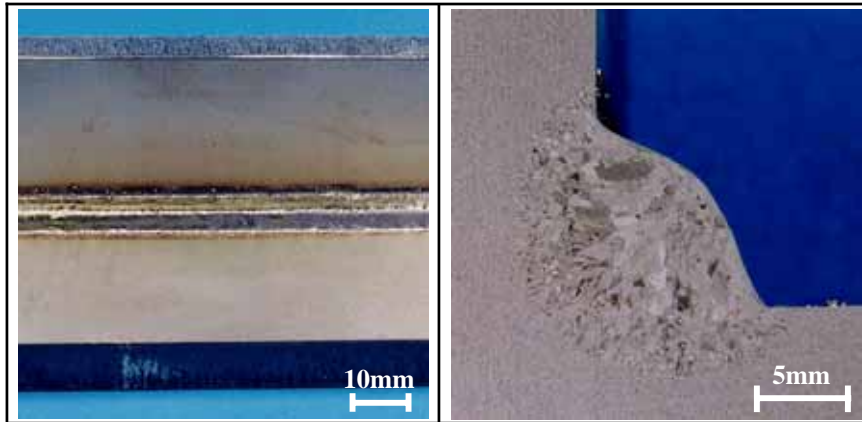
Fillet Welded Joint of Thick Plates
